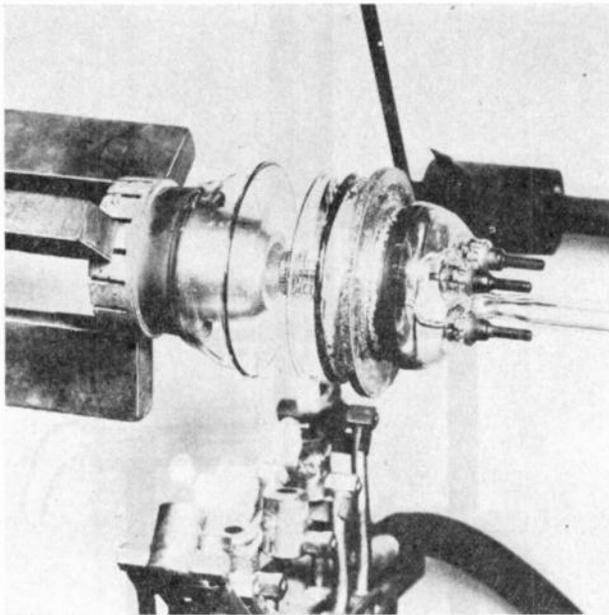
The glass-mounted anode, held by the jaws of the lathe chuck, and the filament-grid assembly are joined at the two glass surfaces.
